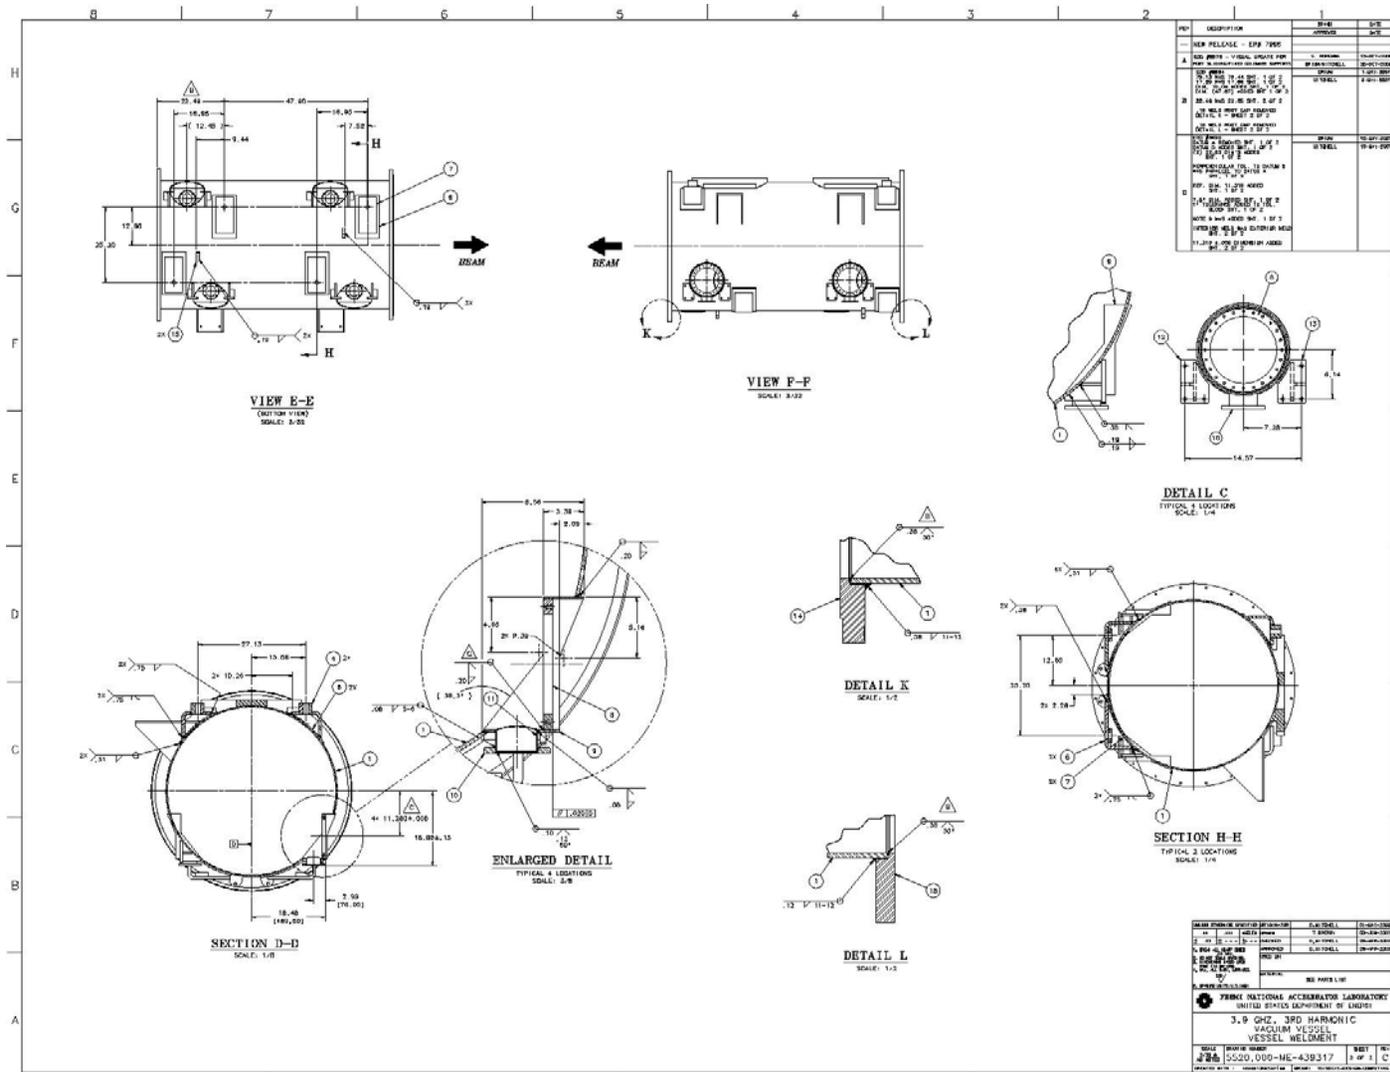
3.9-GHz, 3rd Harmonic Vacuum Vessel Drawing 5520.000-ME-439317, Sheet 2
